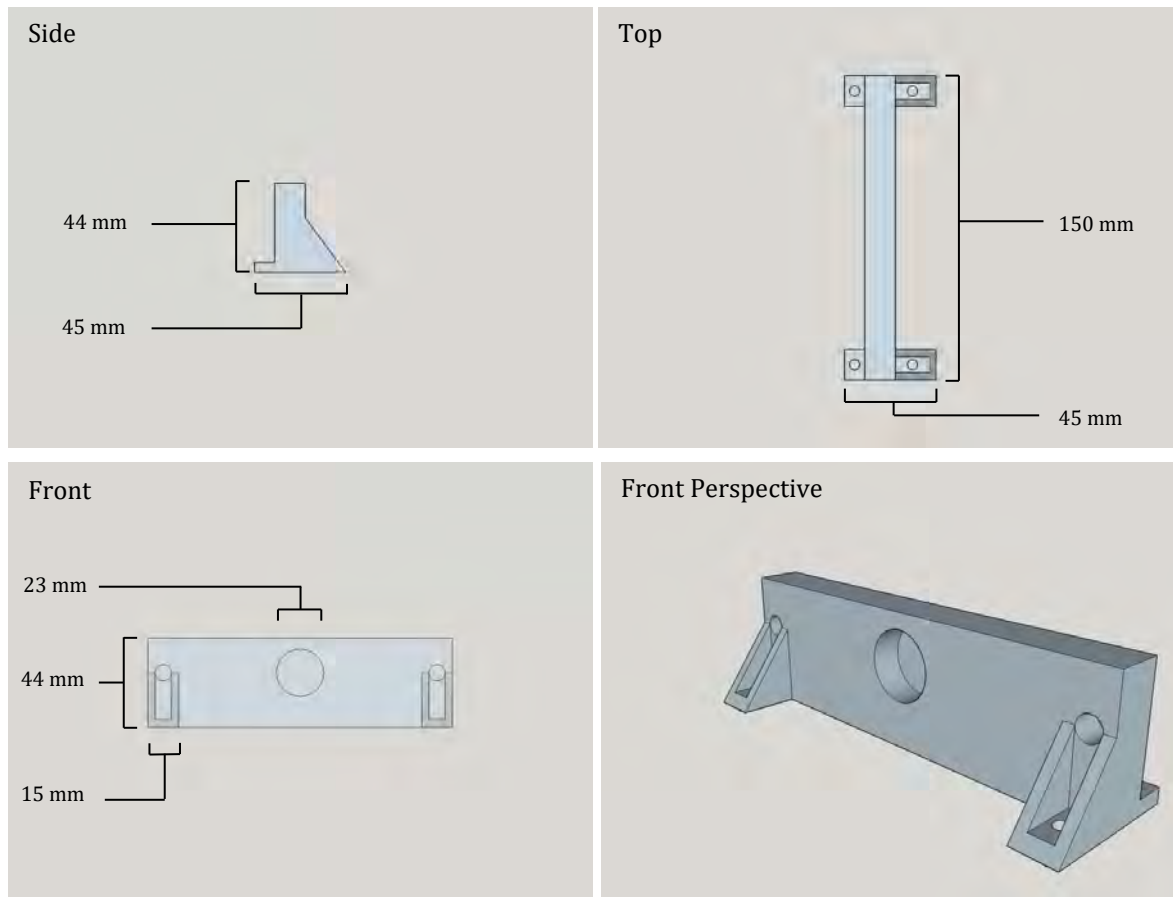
CAD model of the 3D printed outer bracket component of the completed motorized media pumping system.
